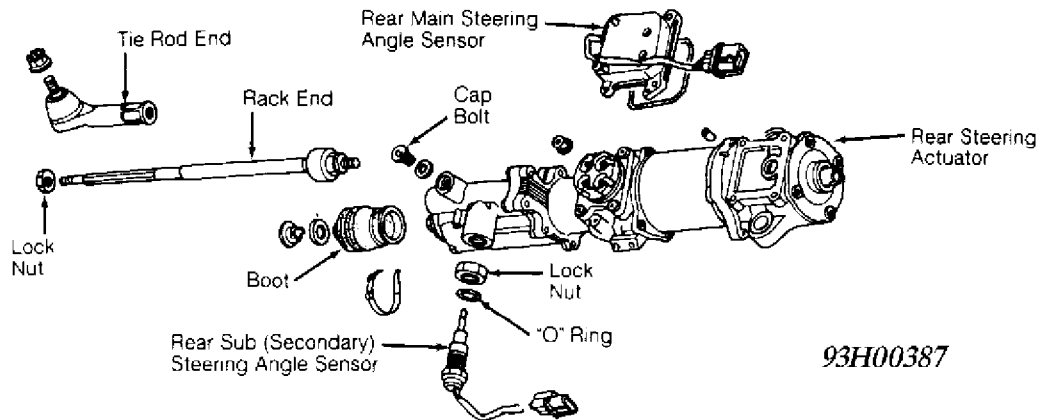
Exploded View Of Rear Steering Actuator Assembly
